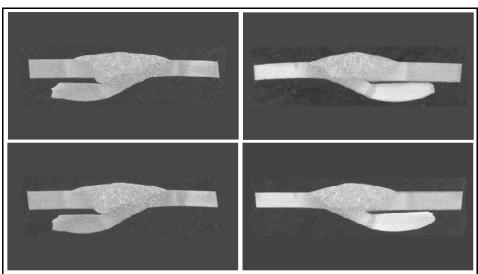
Macrostructure of pressure vessel welds (4x)
